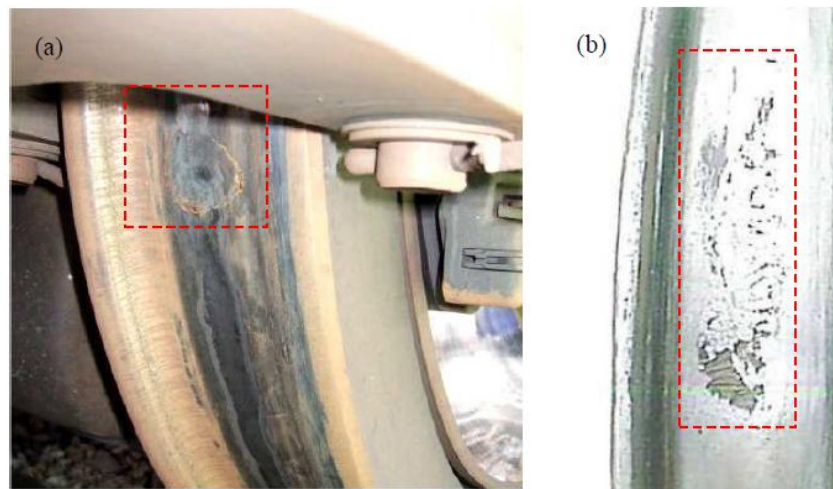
8: Photograph of: a) A wheel flat due to excessive slide B) a severe wheel flat with spalling [10]
